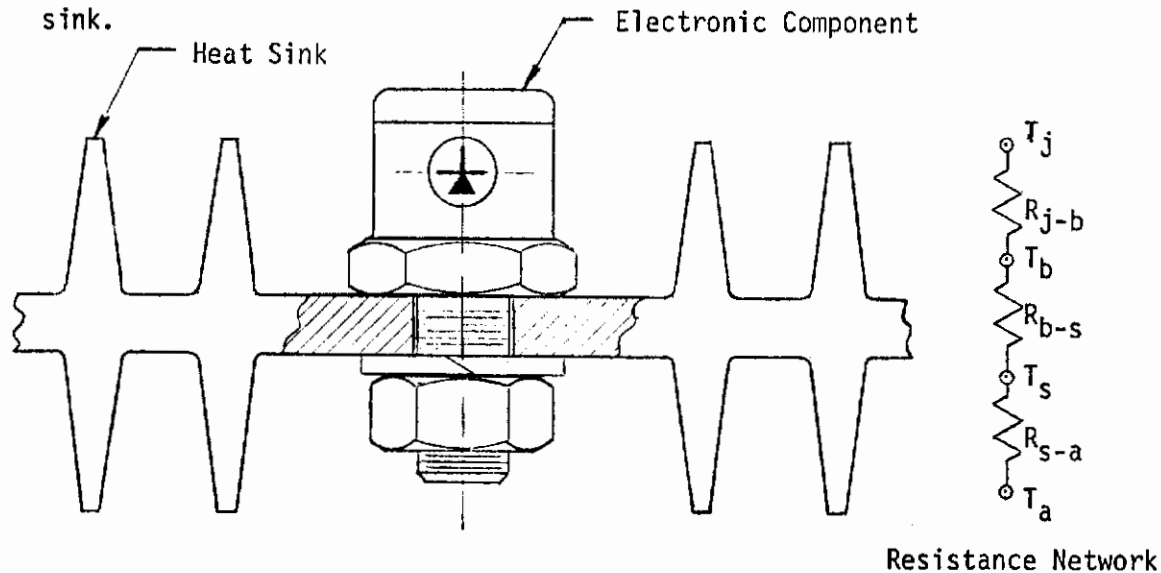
COMPONENT MOUNTING ON A HEAT SINK
